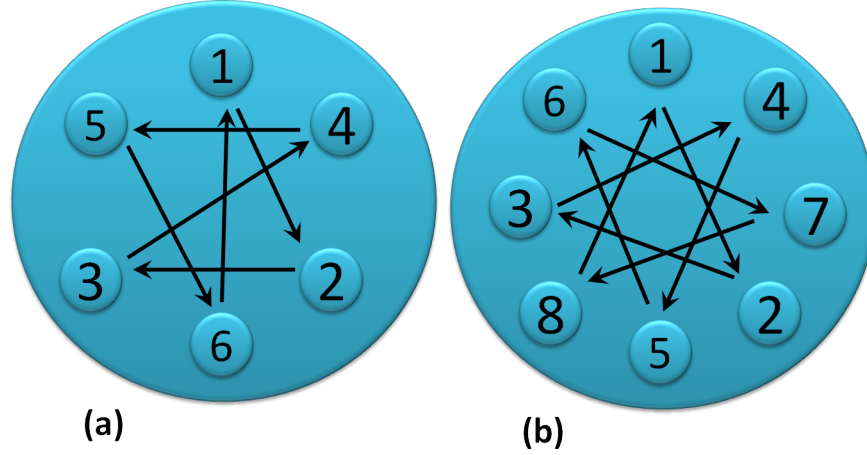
CF tightening pattern for ConFlat flanges with (a) six bolts (b) eight bolts.
